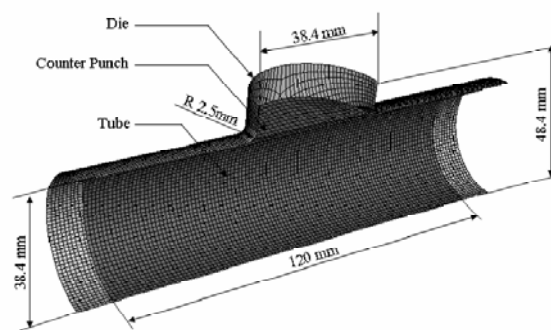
Finite element modeling of hydro-forming a T-shaped tube
